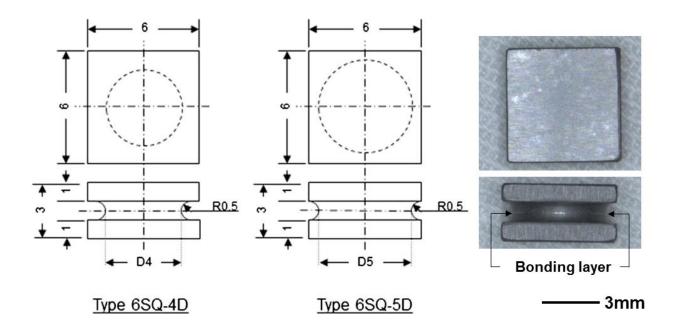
Drawing of 6SQ-4D and -5D torsion specimens, and appearance of machined Ti foil bonded SiC. Unite of drawing is mm.
